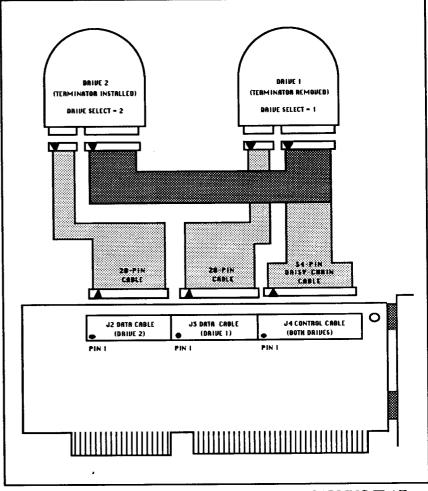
ACB-2322 CONTROLLER AND DRIVE CABLING-FLAT CABLE (HARD DISK CABLES)
